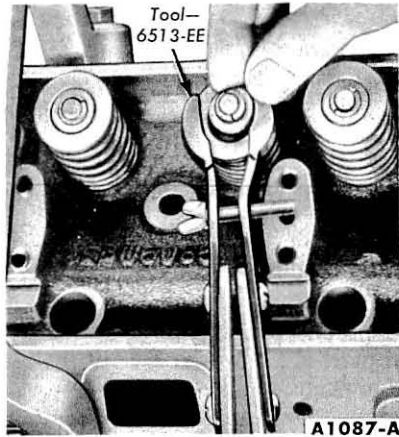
Valve Spring Retainer Lock Removal or Installation
